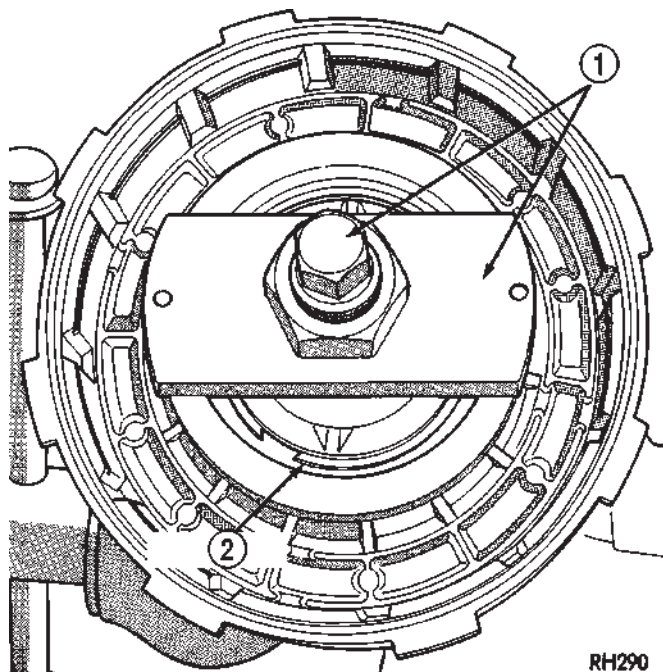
Removing Front Clutch Spring Retainer Snap-Ring
